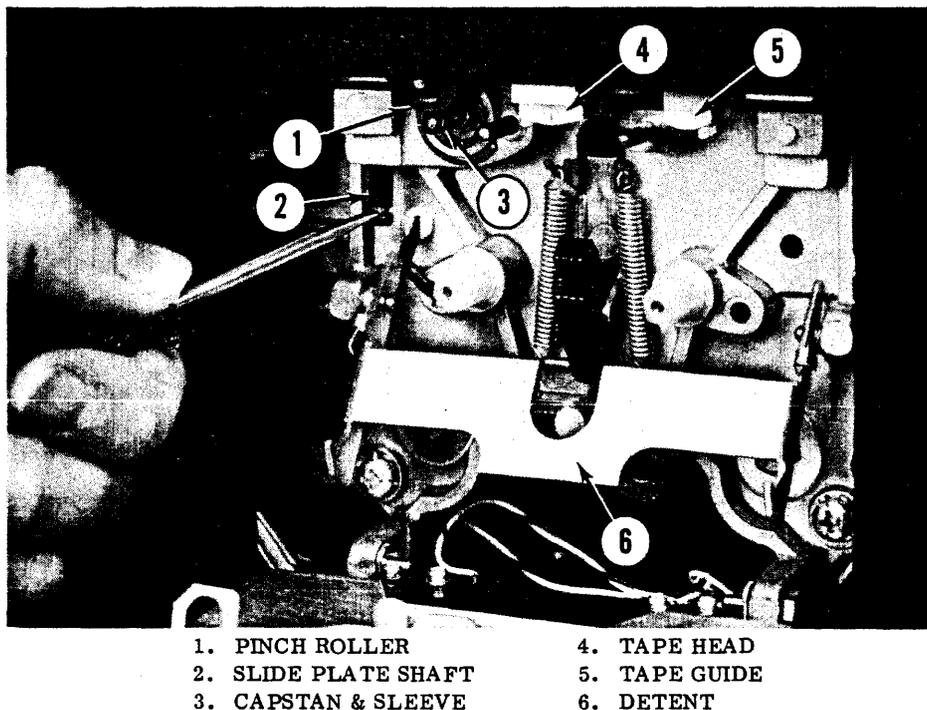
CLEANING TAPE HEAD, GUIDE, PINCH ROLLER
